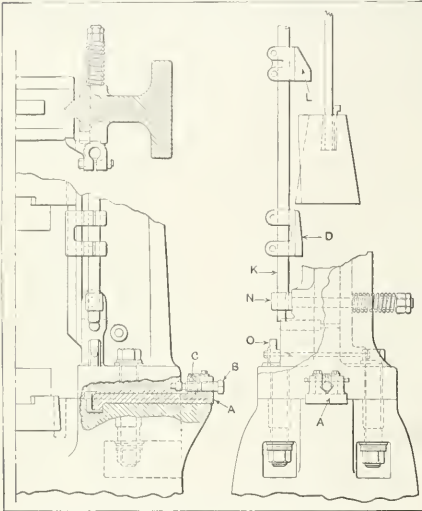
Front and Side Views, showing Roll-releasing and Tripping Mechanism, and Upright Adjusting Bolt
